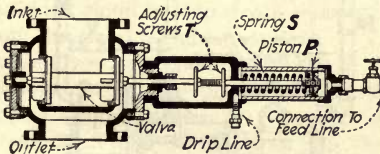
Section Of Horizontal Piston Type Pump Governor.
